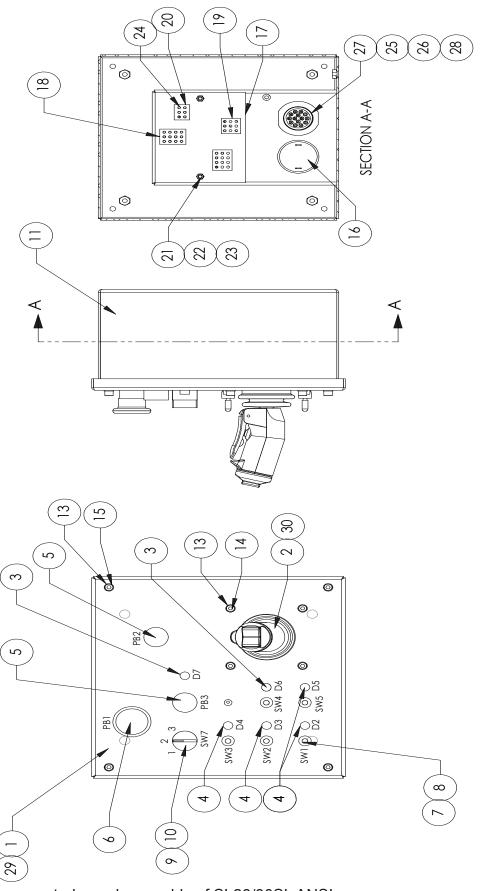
Upper control panel assembly of SL26/30SL ANSI
